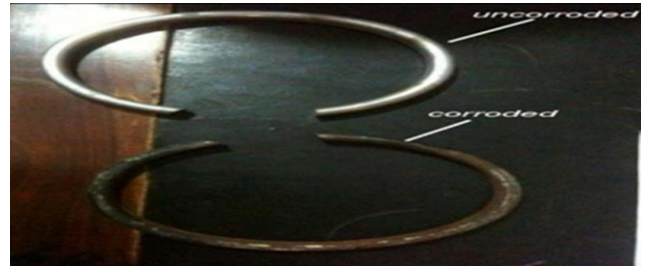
Corroded and uncorroded ring gasket collected from Mari gas oil field
